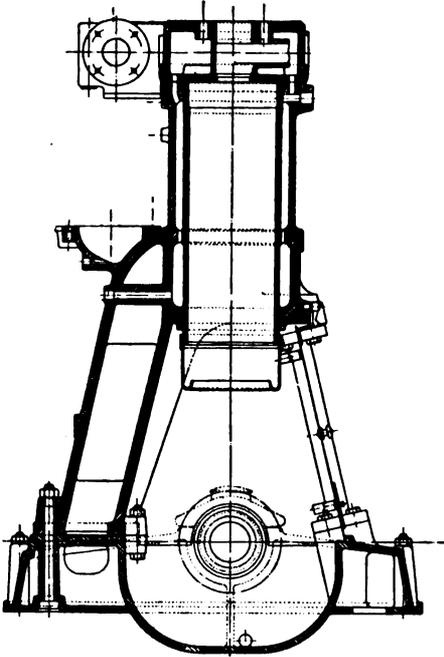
Section of Frame and Cylinder of 150 B.H.P. four-cylinder Gasmotoren Fabrik Deutz Marine Gas Engine.
